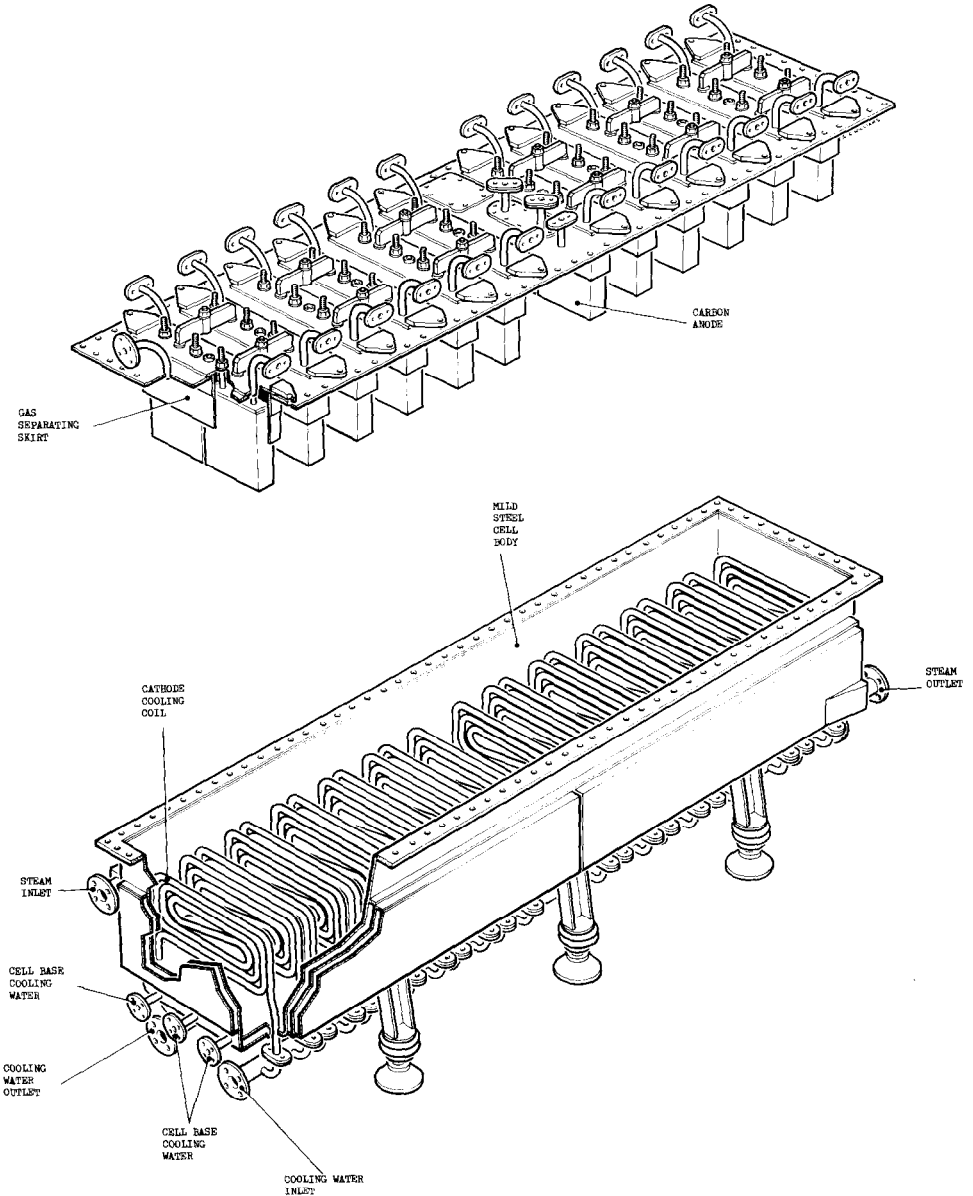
Exploded view of I.C.I. design fluorine cell.
